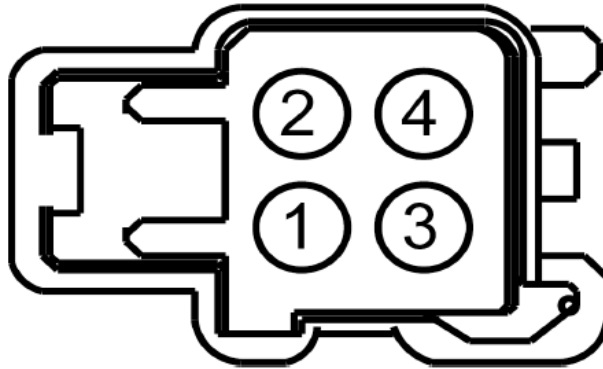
Right Front Seat Backrest Heater Mat Connector End View (C3311)
